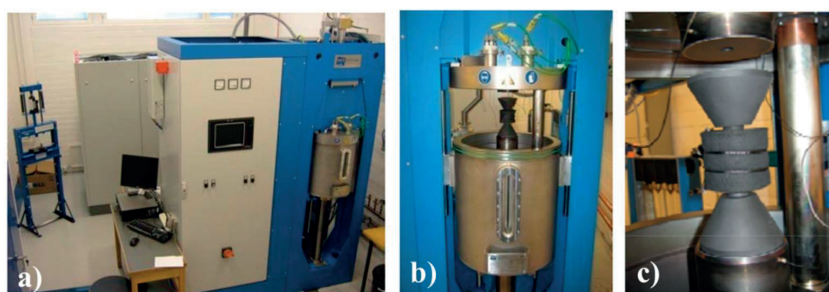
(a) A FCT HP D 25 -type PECS equipment, (b) a vacuum chamber, and (c) a mold assembly placed in the chamber between the electrodes.
